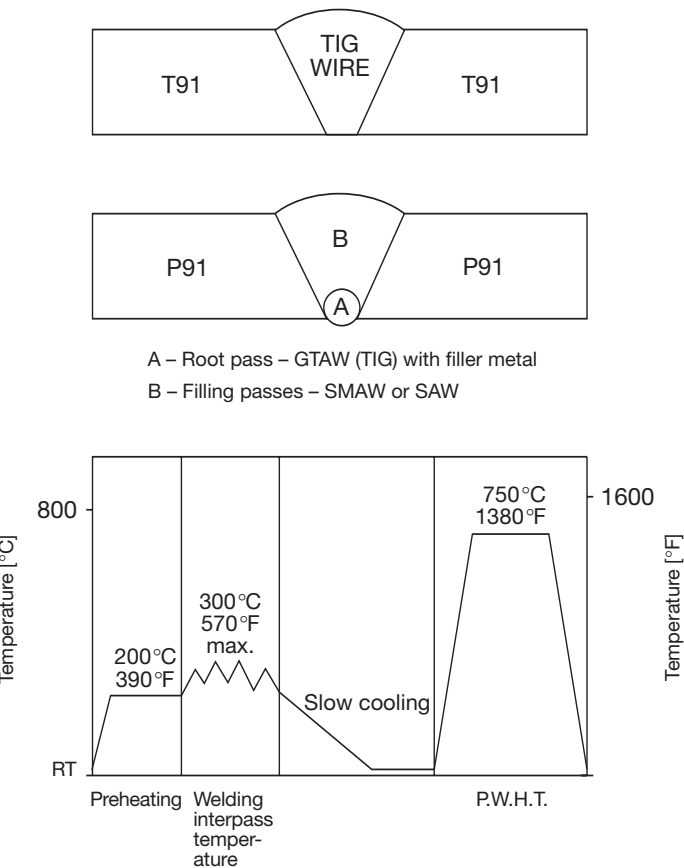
Welding of T/P91 to 12% Cr material
